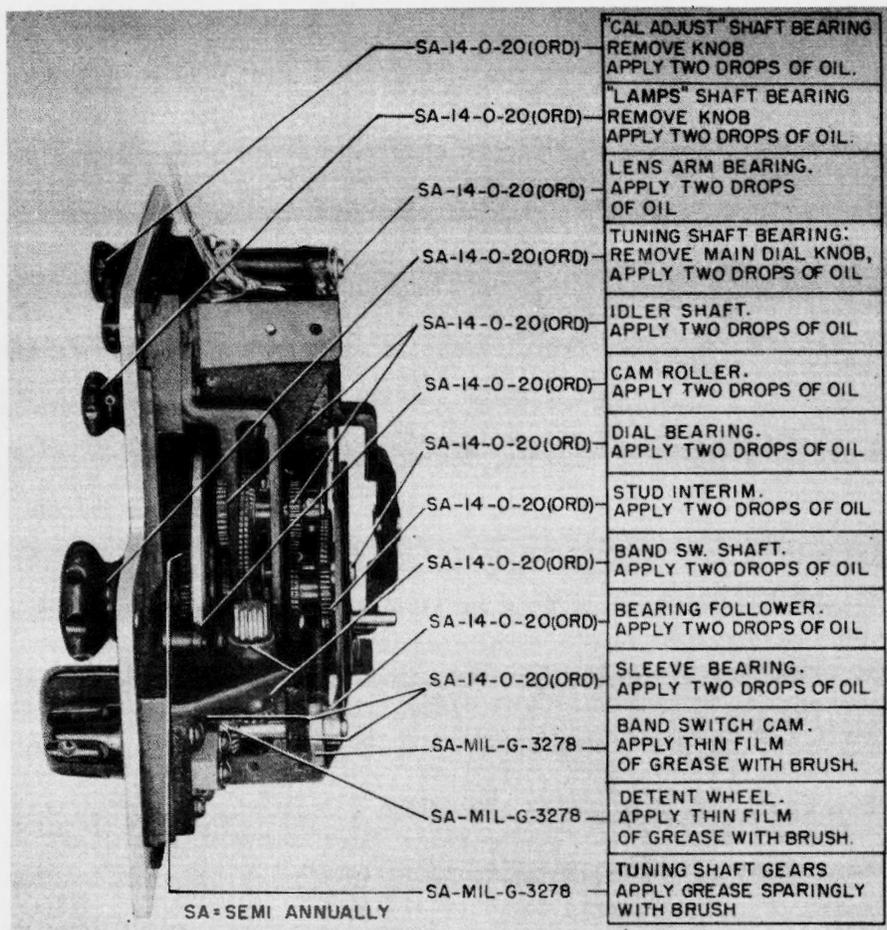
Lubrication Chart, Receiver Chassis Top View
